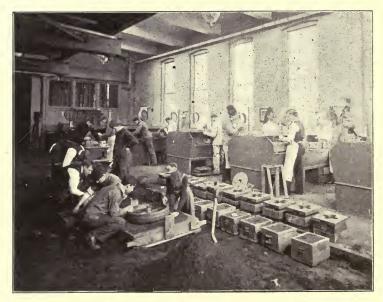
Foundry Equipment, Pratt Institute, Brooklyn, N. Y.
